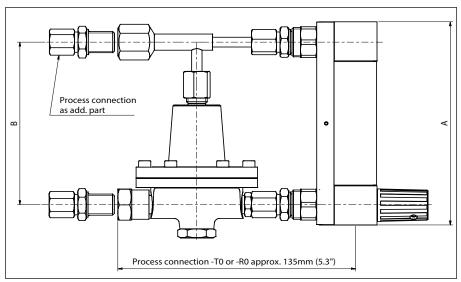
Version with inlet valve and inlet flow controller option /R1
